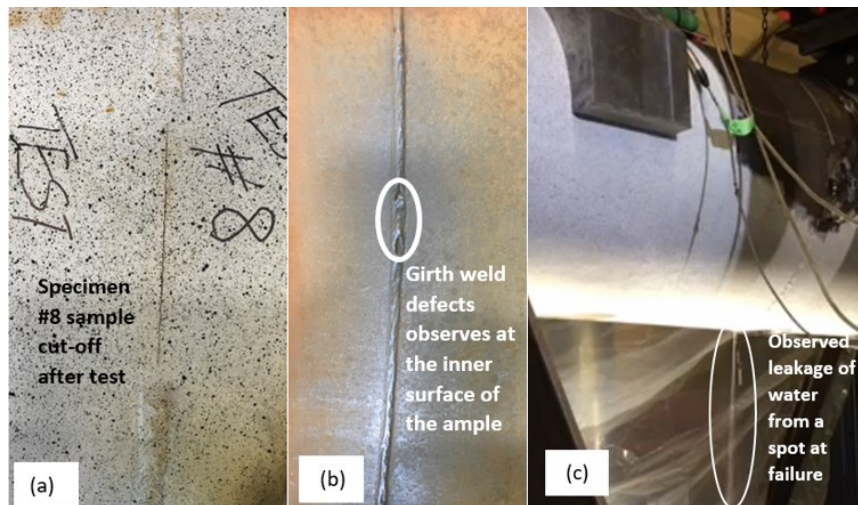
Photograph of Test Specimen 8 (a) sample cut for post-fracture analysis; (b) observed girth weld defects at the inner surface; and (c) leakage of water at failure.
